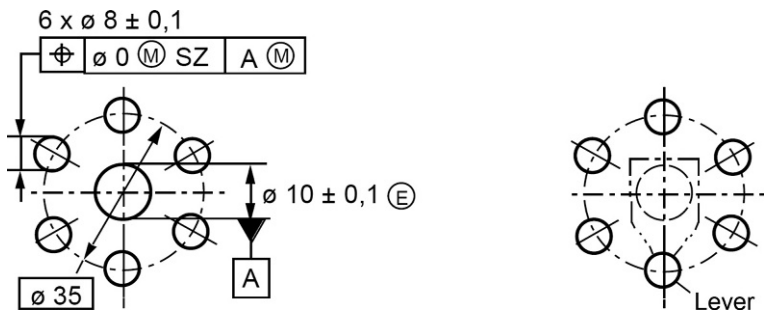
Pattern of holes related to a datum hole with \textcircled{M} , SZ indicated, (left) indication for the holes, (right) assembling with lever
